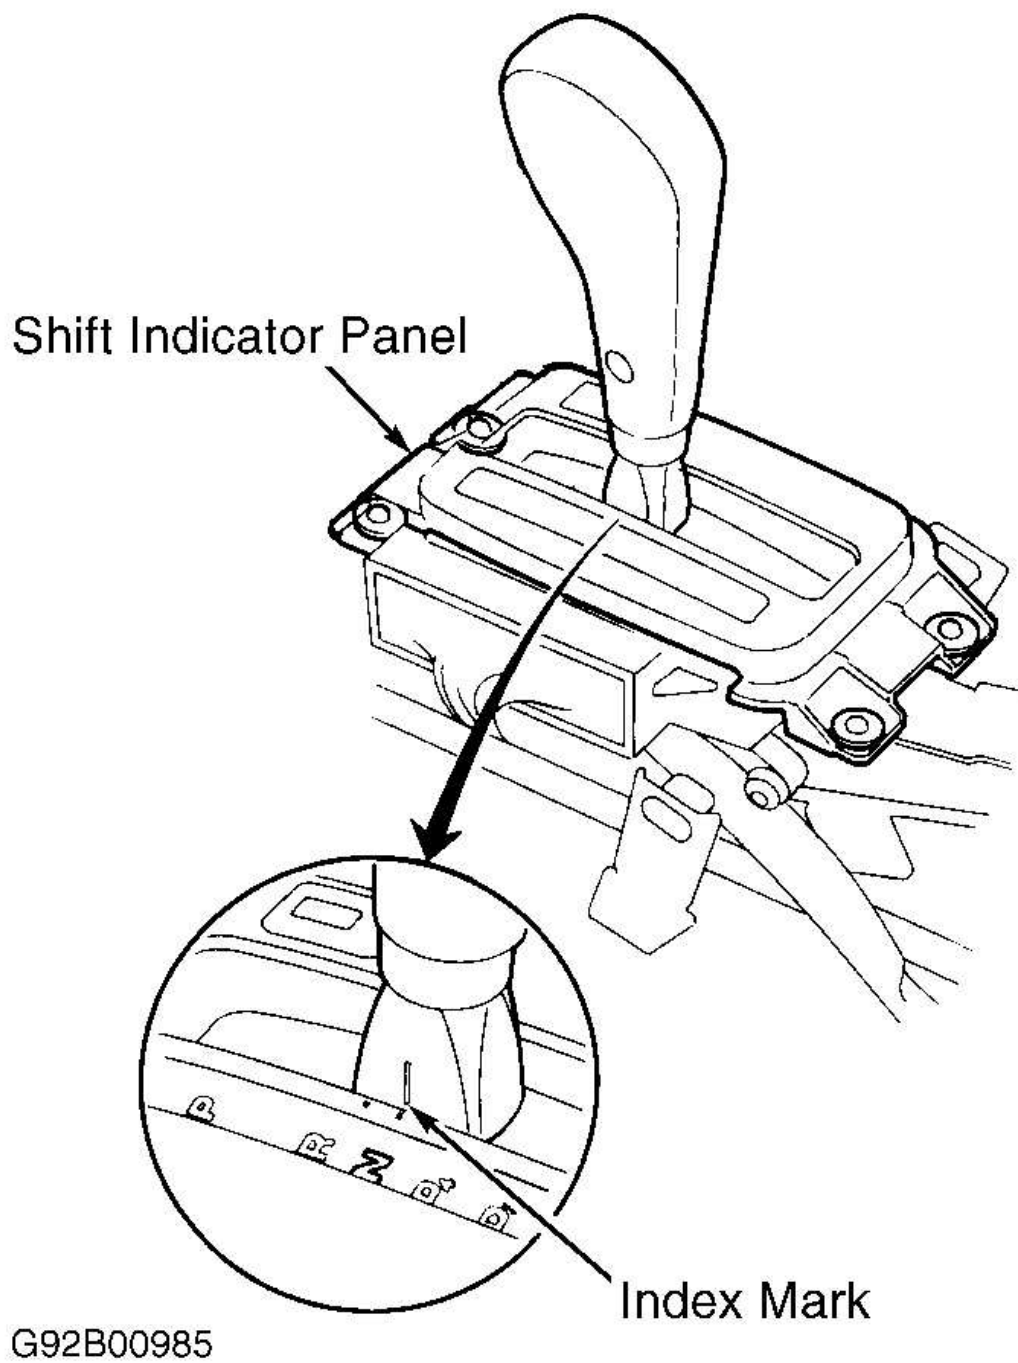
Adjusting Shift Indicator Panel (Integra)
